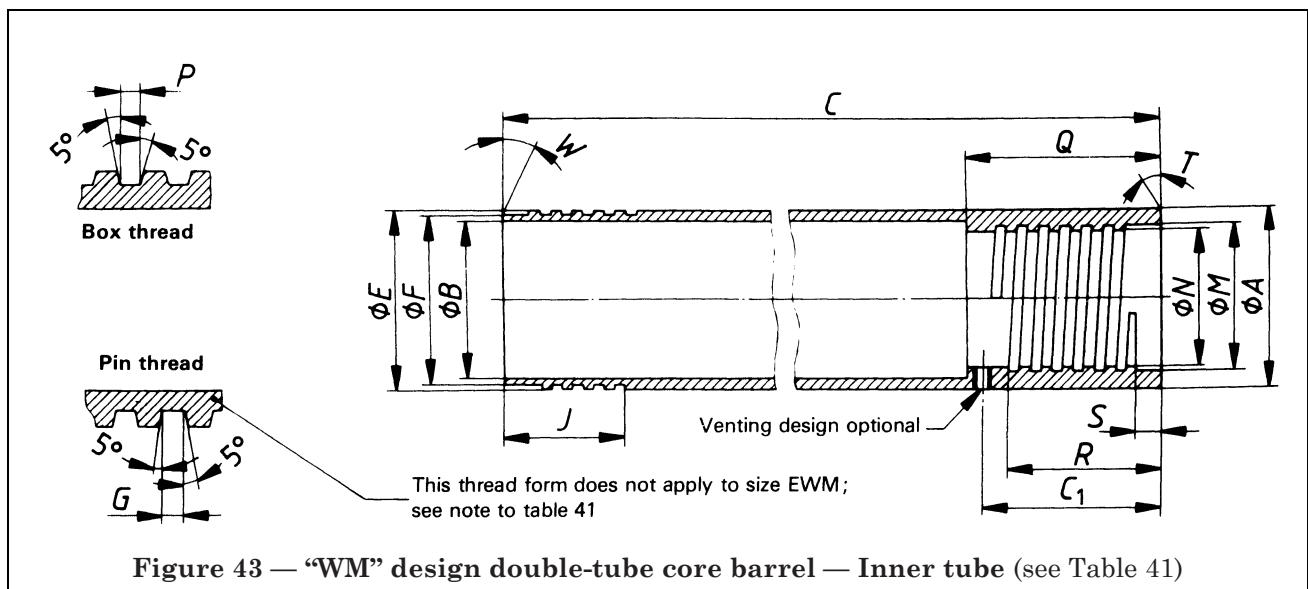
"WM" design double-tube core barrel — Inner tube (see Table 41)
